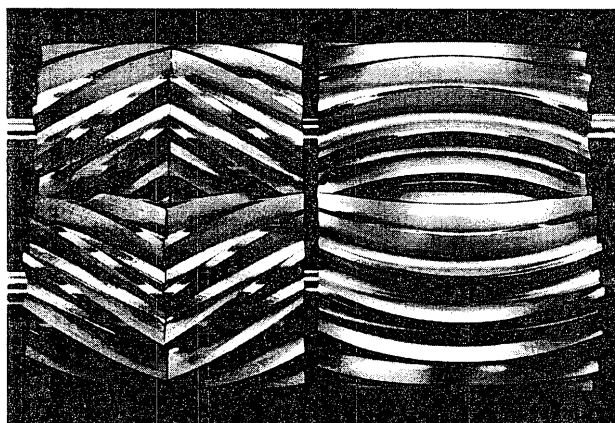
Comparison between the double helical gear and the curvilinear-tooth gear
